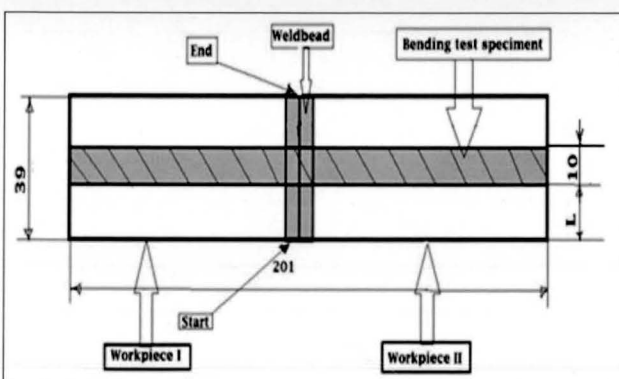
Location of bending test specimen to cut from a work piece (L is from 10-12 mm).
